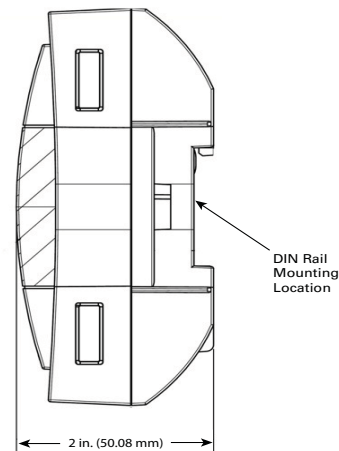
Side view of PCM501, PCM502 and PCM503 enclosure
